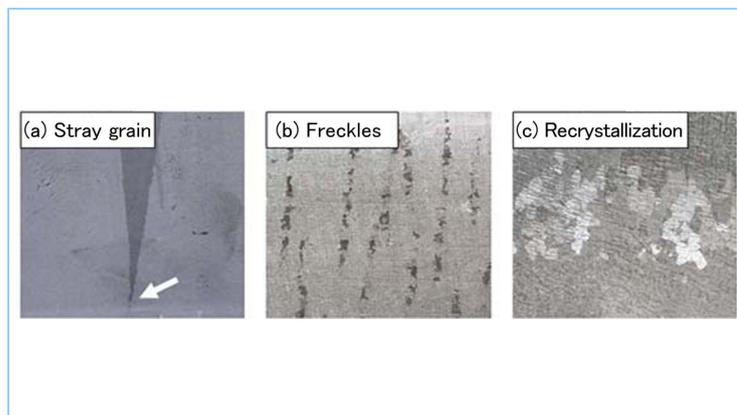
Casting defects in directionally-solidified or single-crystal blades
